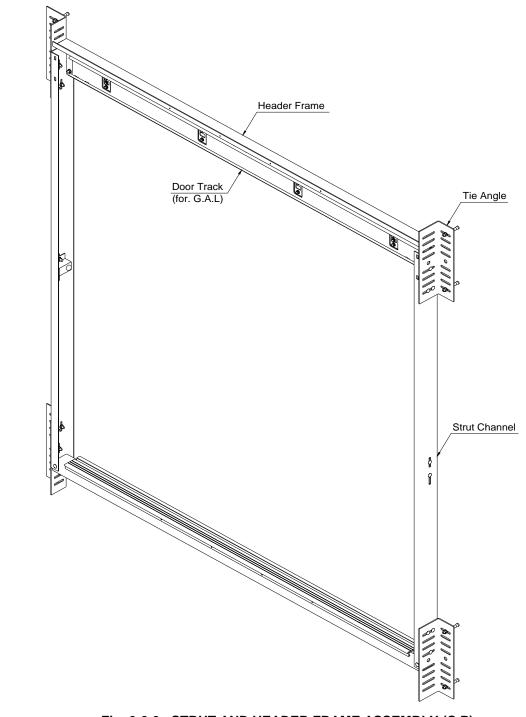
STRUT AND HEADER FRAME ASSEMBLY (C.P)
